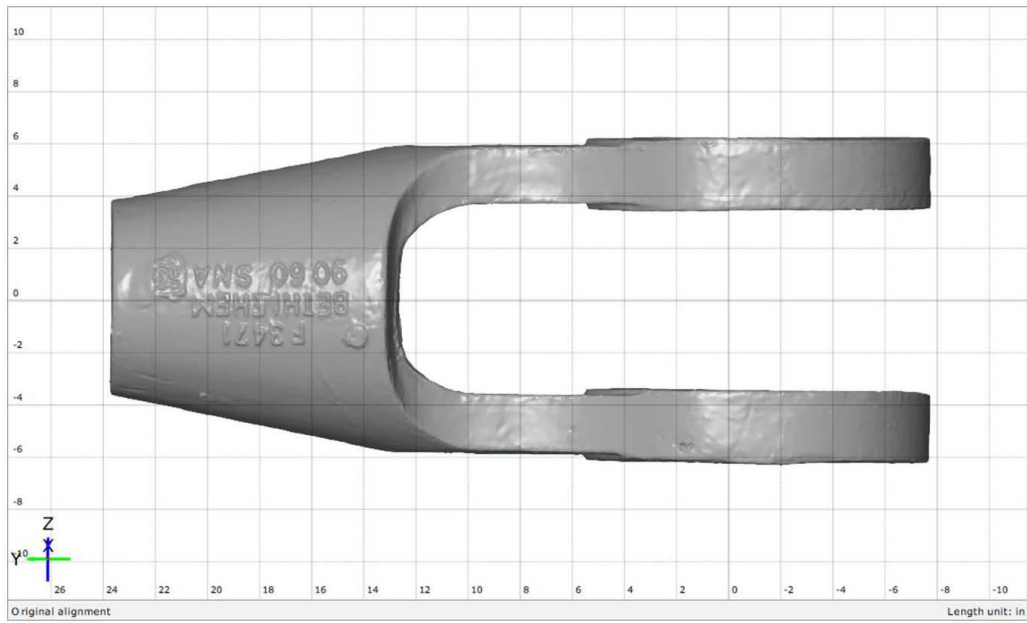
Laser scan of the as-received M4N socket, bottom view.
